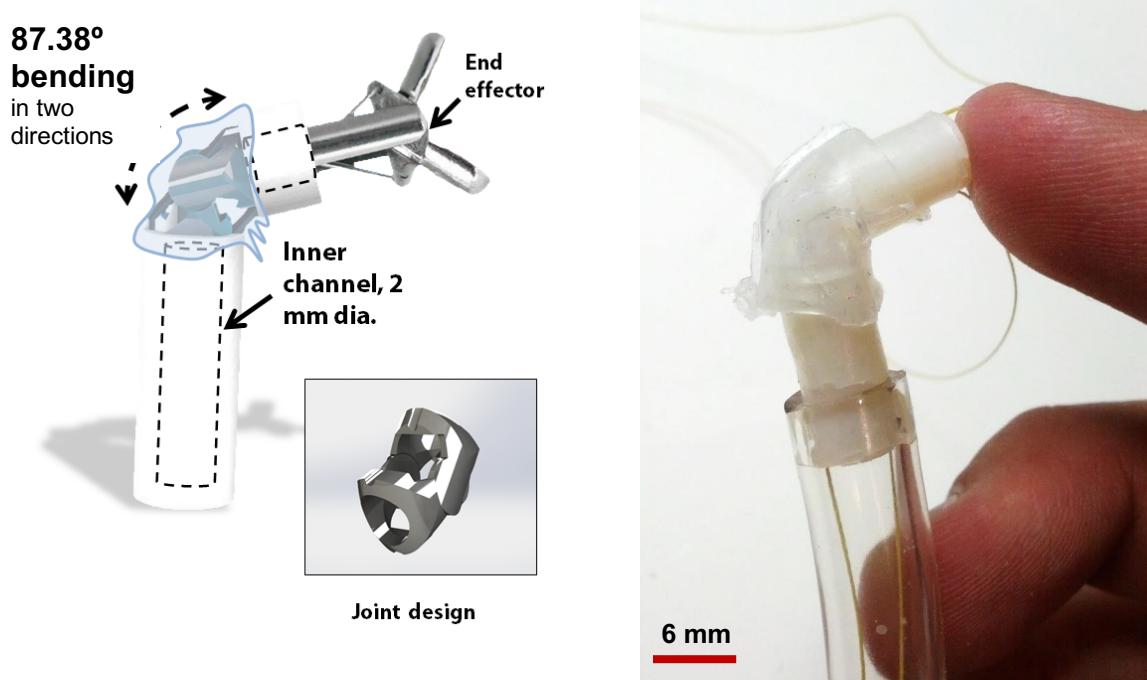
CAD rendering of final pin joint design, with the joint highlighted (left); 2:1 scale prototype (right)
